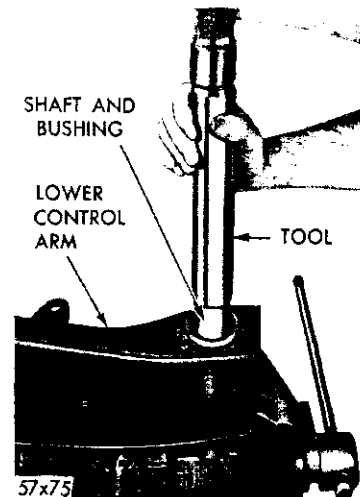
Installing the Lower Control Arm Shaft Assembly
